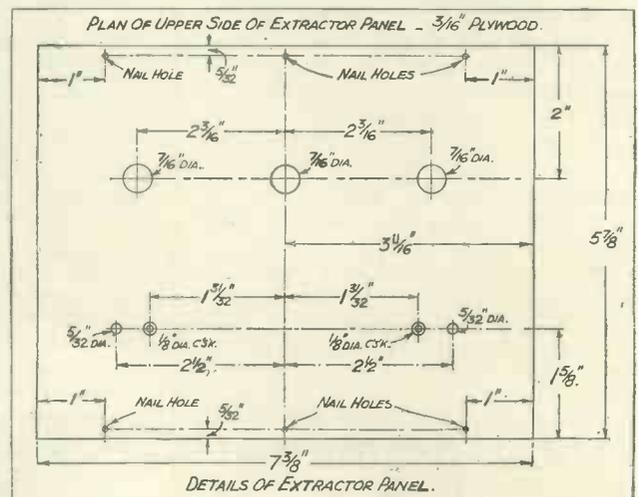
All the hole positions in the panel of the Triple Extractor, and their sizes, are given in this diagram.
